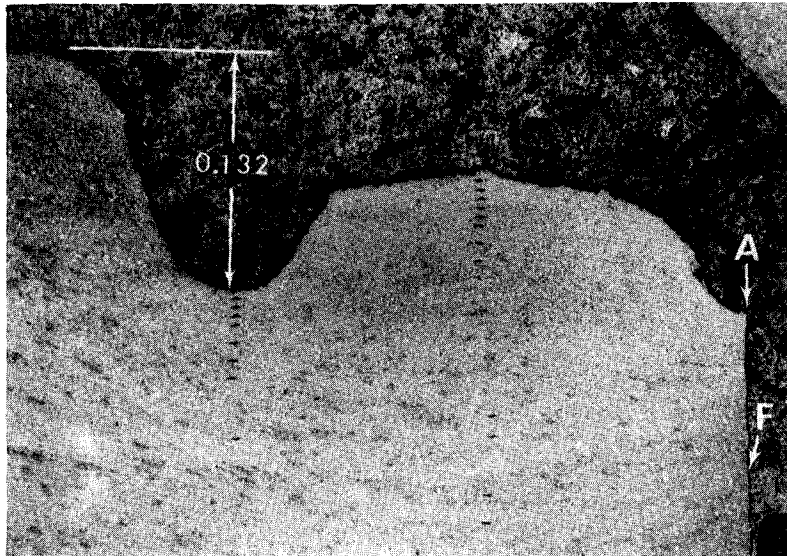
Metallographic microsection through stamped letter in the origin area shown by bracket "A" in Figure 5A (section A-A, Figure 5A). Arrow "A" indicates origin area in root of stamping and arrow "F" denotes the fatigue fracture surface profile. Diamond shaped marks in section are Knoop hardness indentations. X10 nital etched.
